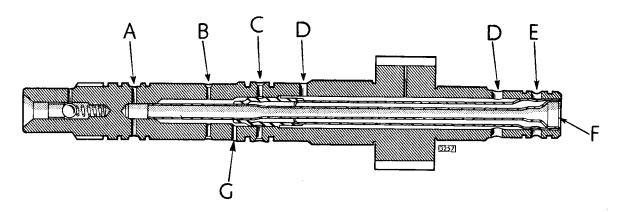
Longitudinal section of the forward sun gear showing oil ways
